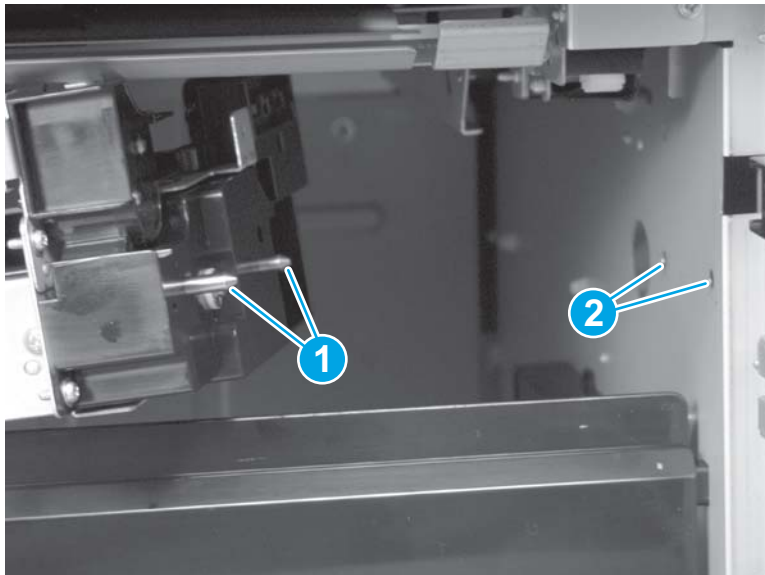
Remove the HCI right tray pickup assembly (3 of 3)
